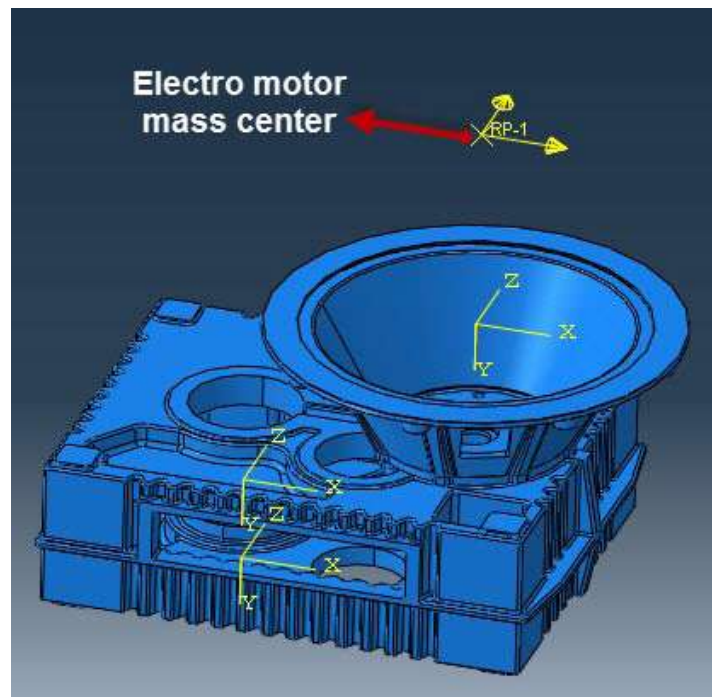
Unbalanced force applied by the electro motor on the gearbox
